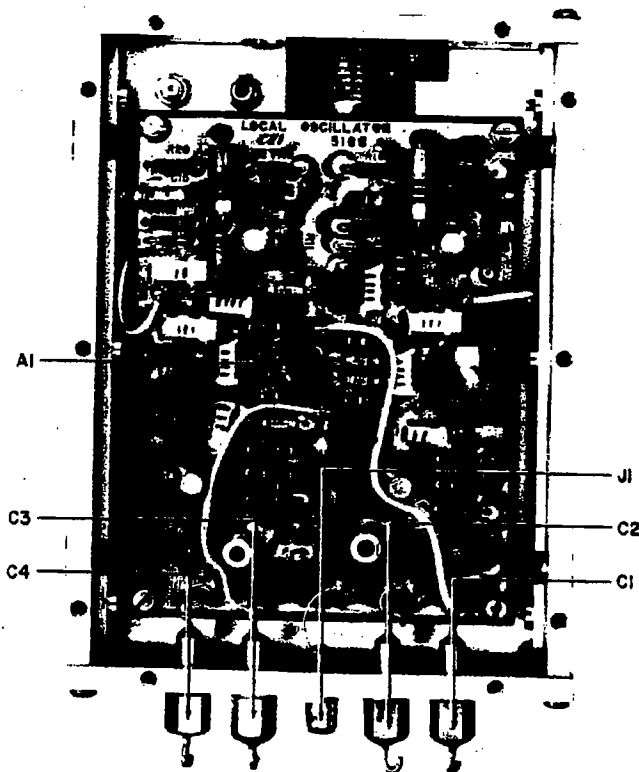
Type 7749 LO Tuning Assembly (A18A1) Bottom View, Component Locations
